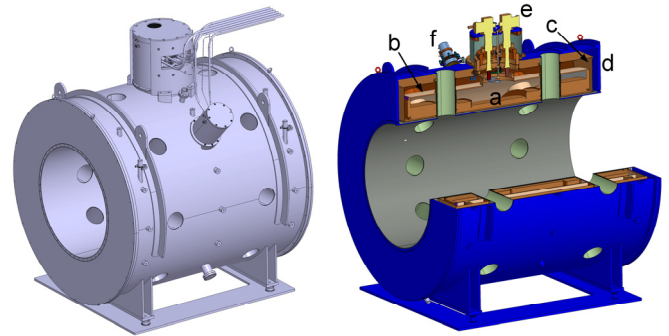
Design drawing of the magnet system (left) as well as a cut-out (right) revealing the coils (a), helium vessel (b), radiation shield (c) and vacuum vessel (d). The turret (e) house two cryocoolers, while a third cryocooler (f) is connected to the radiation shield only.
